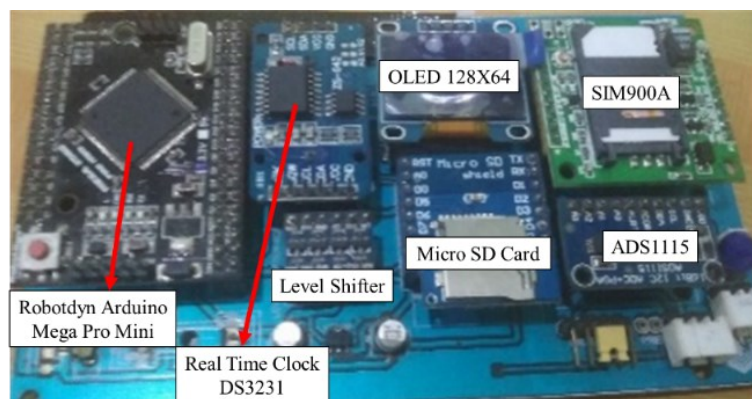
Component Integration Process - Mounting Components on the Printed Circuit Board
